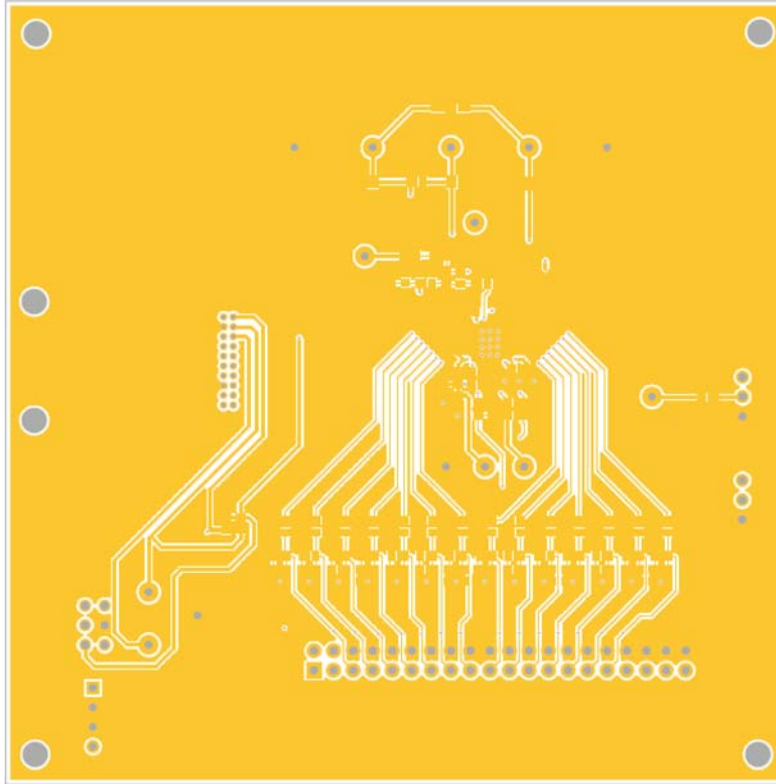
BOTTOM LAYER SOLDER SIDE
